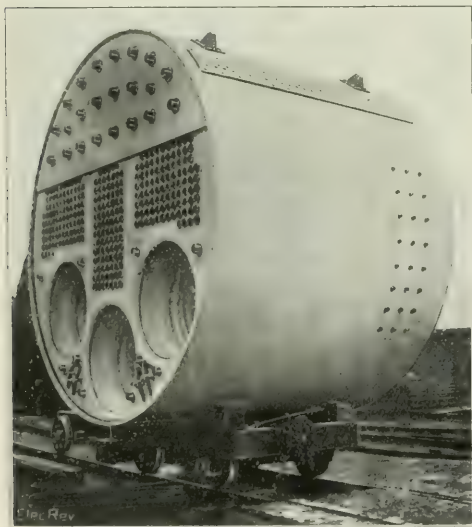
HAWTHORN-WYBER WELDED BOILER.
